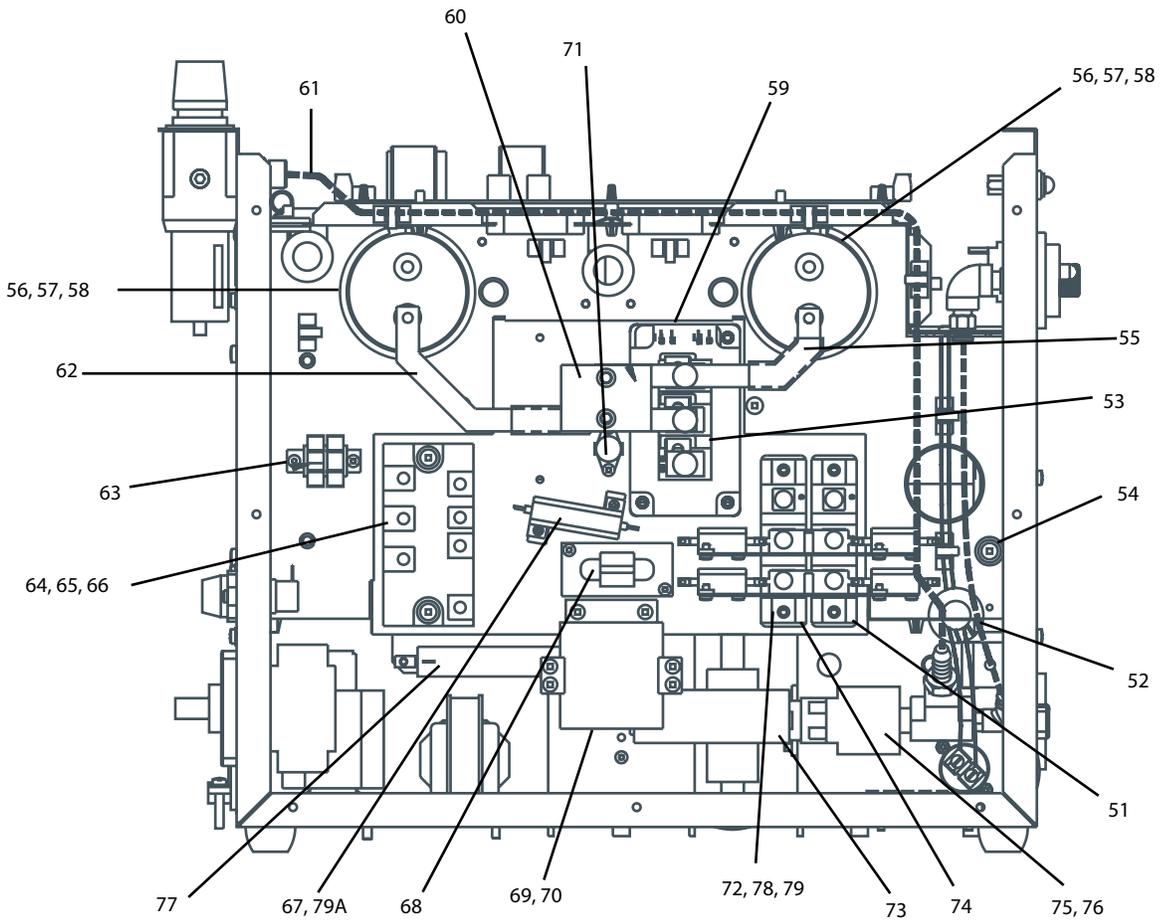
PCM-1125 Power Source, Left Side View (460/575)
